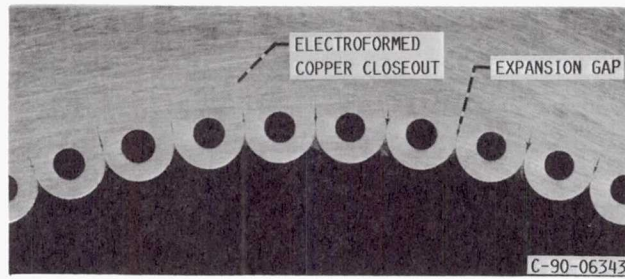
CHAMBER LINER WALL CROSS-SECTION SHOWING ELECTROFORM-FUSED TUBULAR-BUNDLE.
